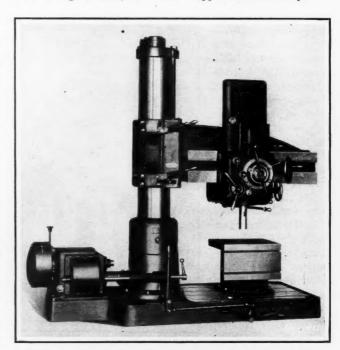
Front View of 4-foot Carlton Radial Drilling Machine with Belted Motor Drive through Gear-box
